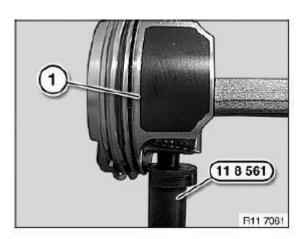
Identifying Special Tool (11 8 561) With Piston Courtesy of BMW OF NORTH AMERICA, INC.
